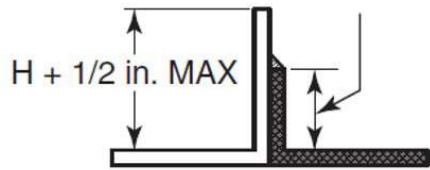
Uneven Flange Joint (H Defined By Shorter Flange)
